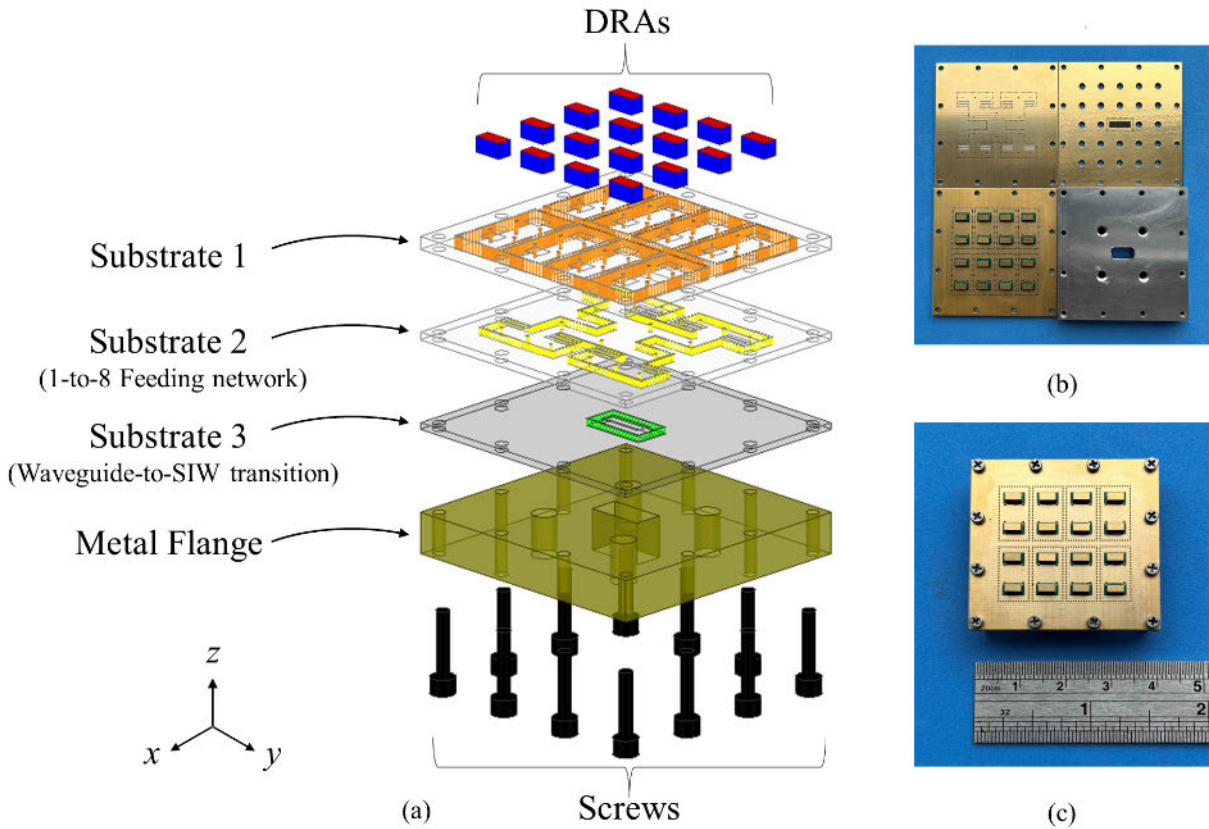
(a) Geometry of the proposed antenna array. (b) Photograph of different layers of the prototype. (c) Photograph of the prototype after assembly.
